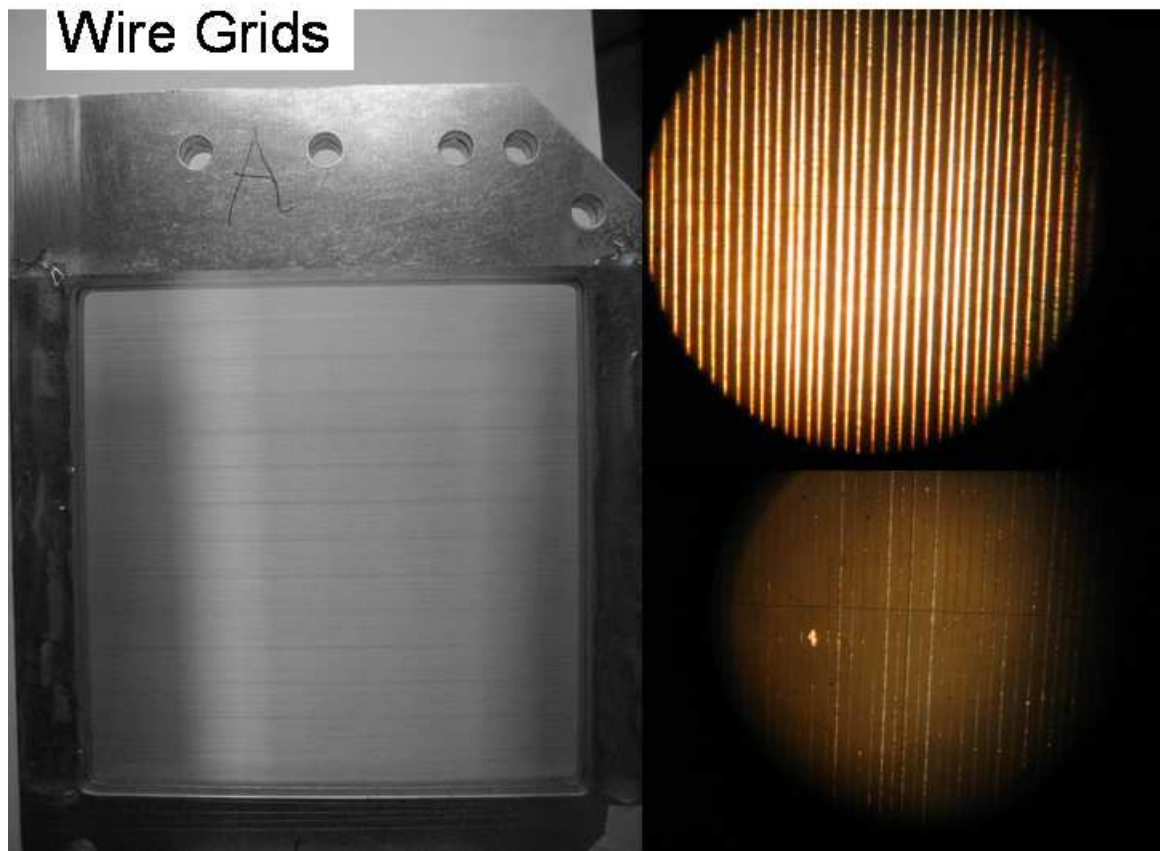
The first small grid made at UCSD showing the general shape of the grids and wire layout (left side picture). A digital microscope (upper right) and a measuring microscope (lower right) were used to characterize the quality of the grid and winding process. The average wire spacing is 93 microns with a standard deviation of 23 microns.
